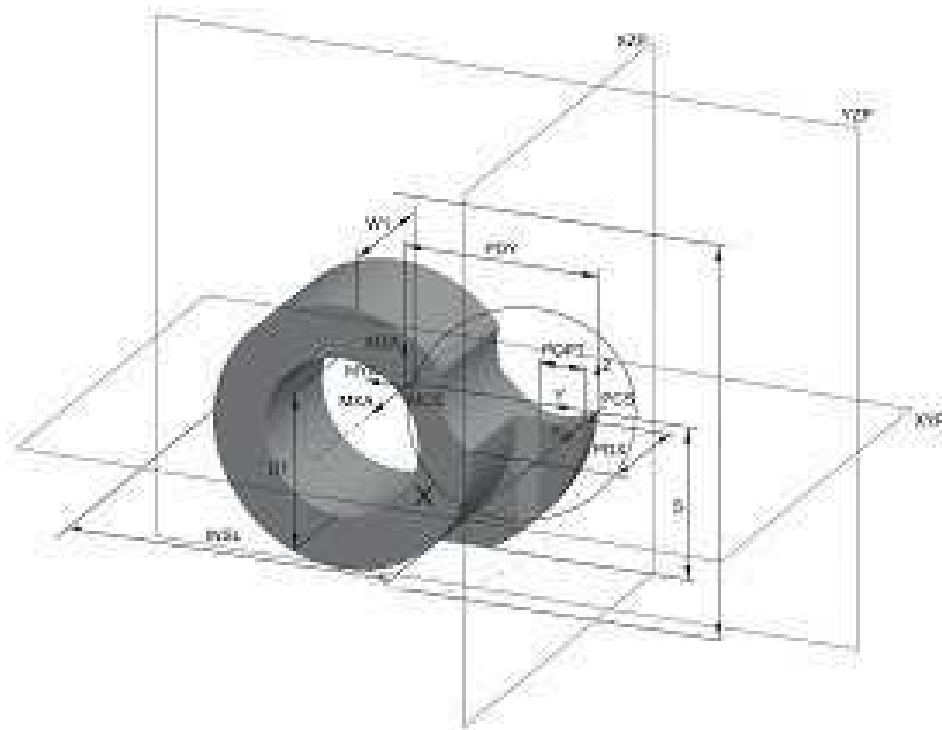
Screw mounted grooving insert with one cutting edge: basic model
